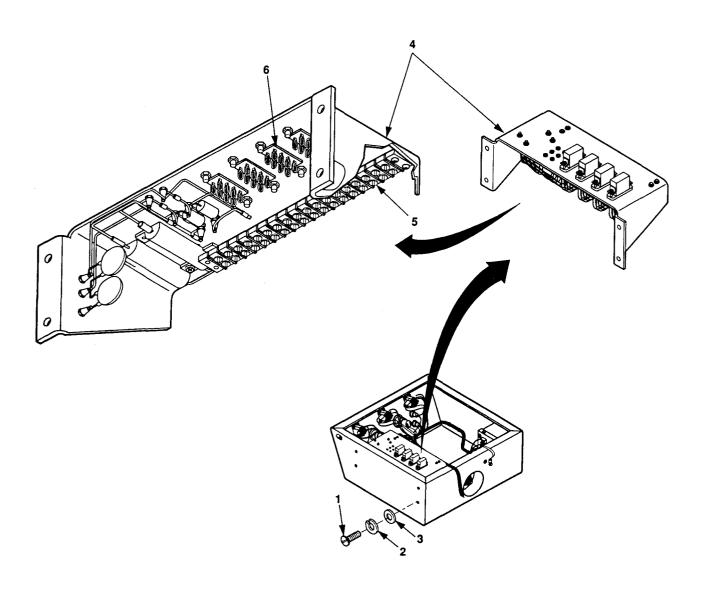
Relay Board Harness Assembly W11 Removal.
